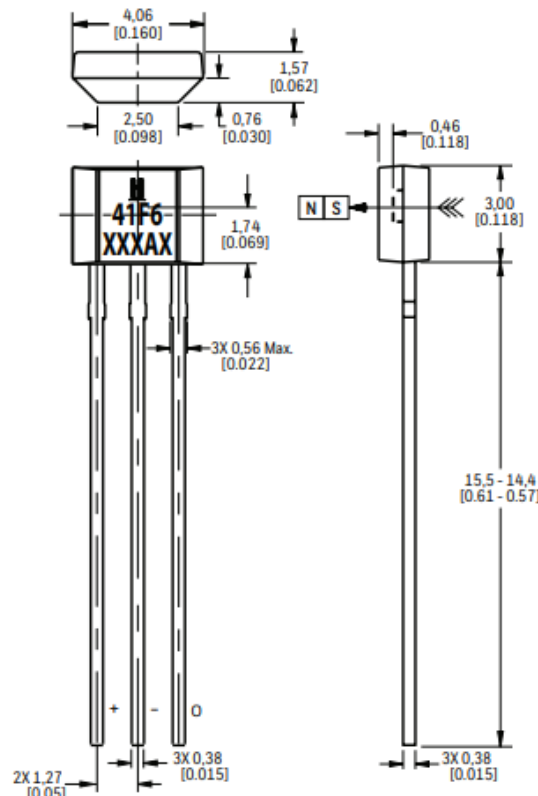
MOUNTING AND DIMENSIONAL DRAWINGS (FOR REFERENCE ONLY: MM/[IN])
